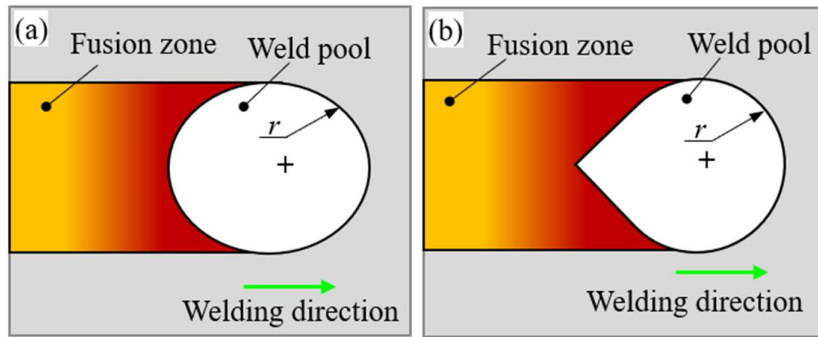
Schematic of weld pool shape: (a) elliptical shape; (b) tear drop shape
